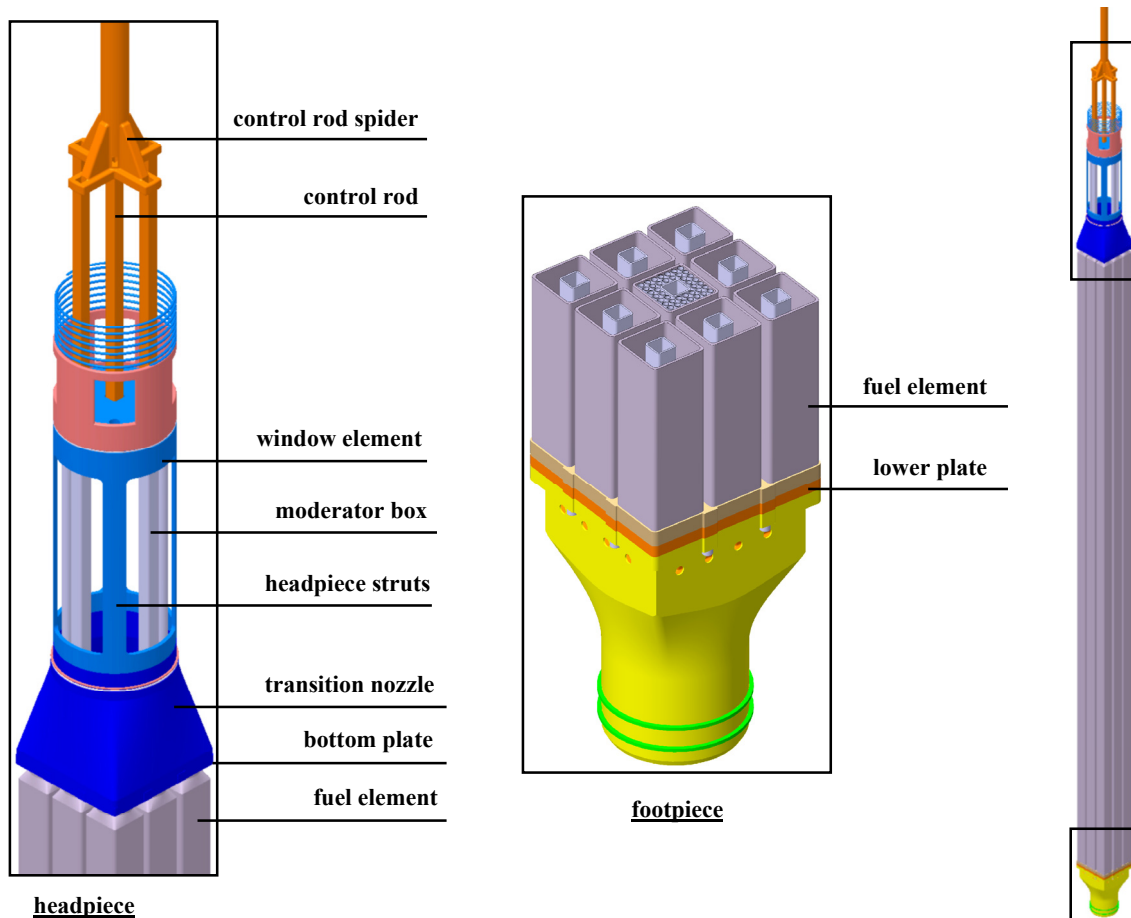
headpiece and footpiece of the HPLWR fuel assembly cluster [19]
